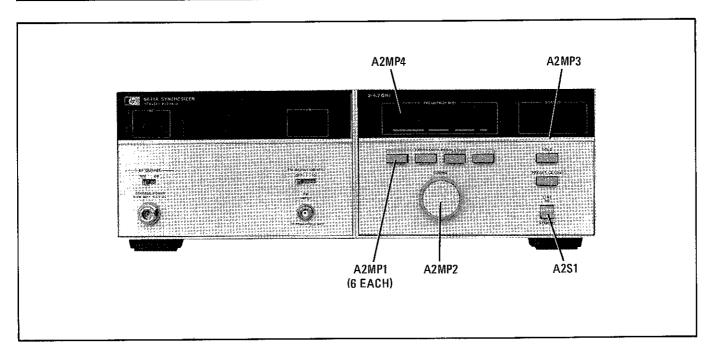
A2 Assembly, Front Panel Mechanical Parts
